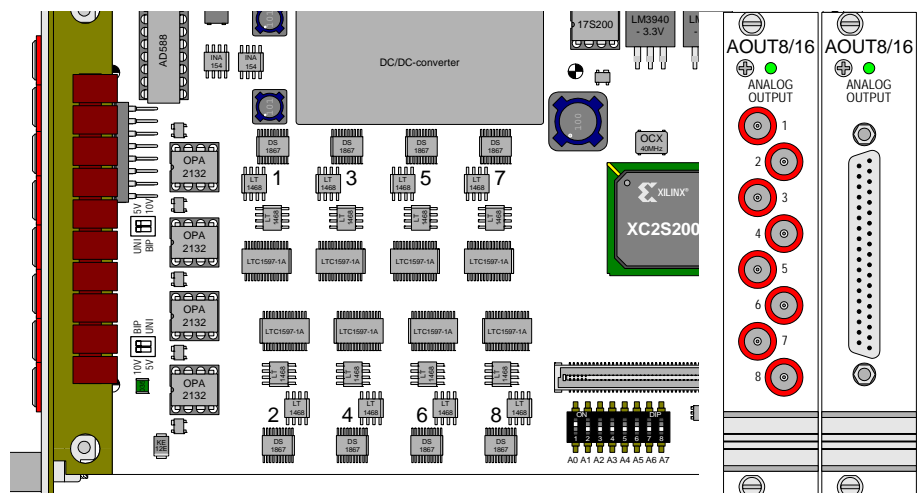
Pro-AOut-8/16 REVC: Printed circuit board(detail) and front panels
